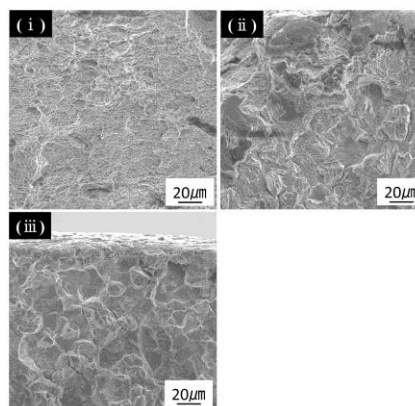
The fracture surfaces of the (i) ductile, (ii) quasi cleavage and (iii) intergranular fractures.
